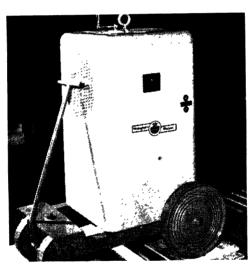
A direct current arc welder using selenium rectifiers. Note the adjusting handle on top, the cooling fan air outlet on the left, and the wheels for portability
